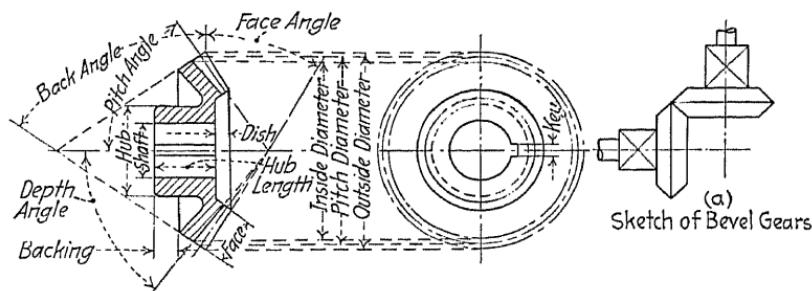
Working drawing of a bevel gear, showing all dimensions necessary for production. Sketch (a) shows manner of representing a bevel gear in an assembly drawing.
